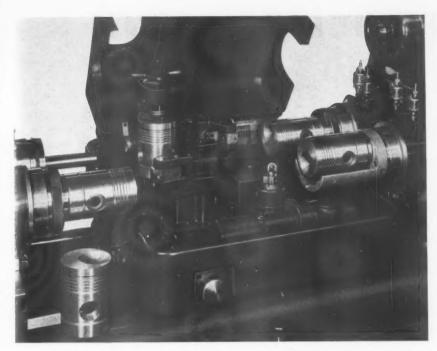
A close-up view of the four station fixture for performing five different operations on α Diesel piston. Complete machine illustrated in Fig. 1.
